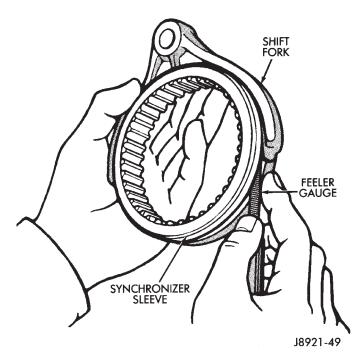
Checking Shift Fork-To-Sleeve Clearance
